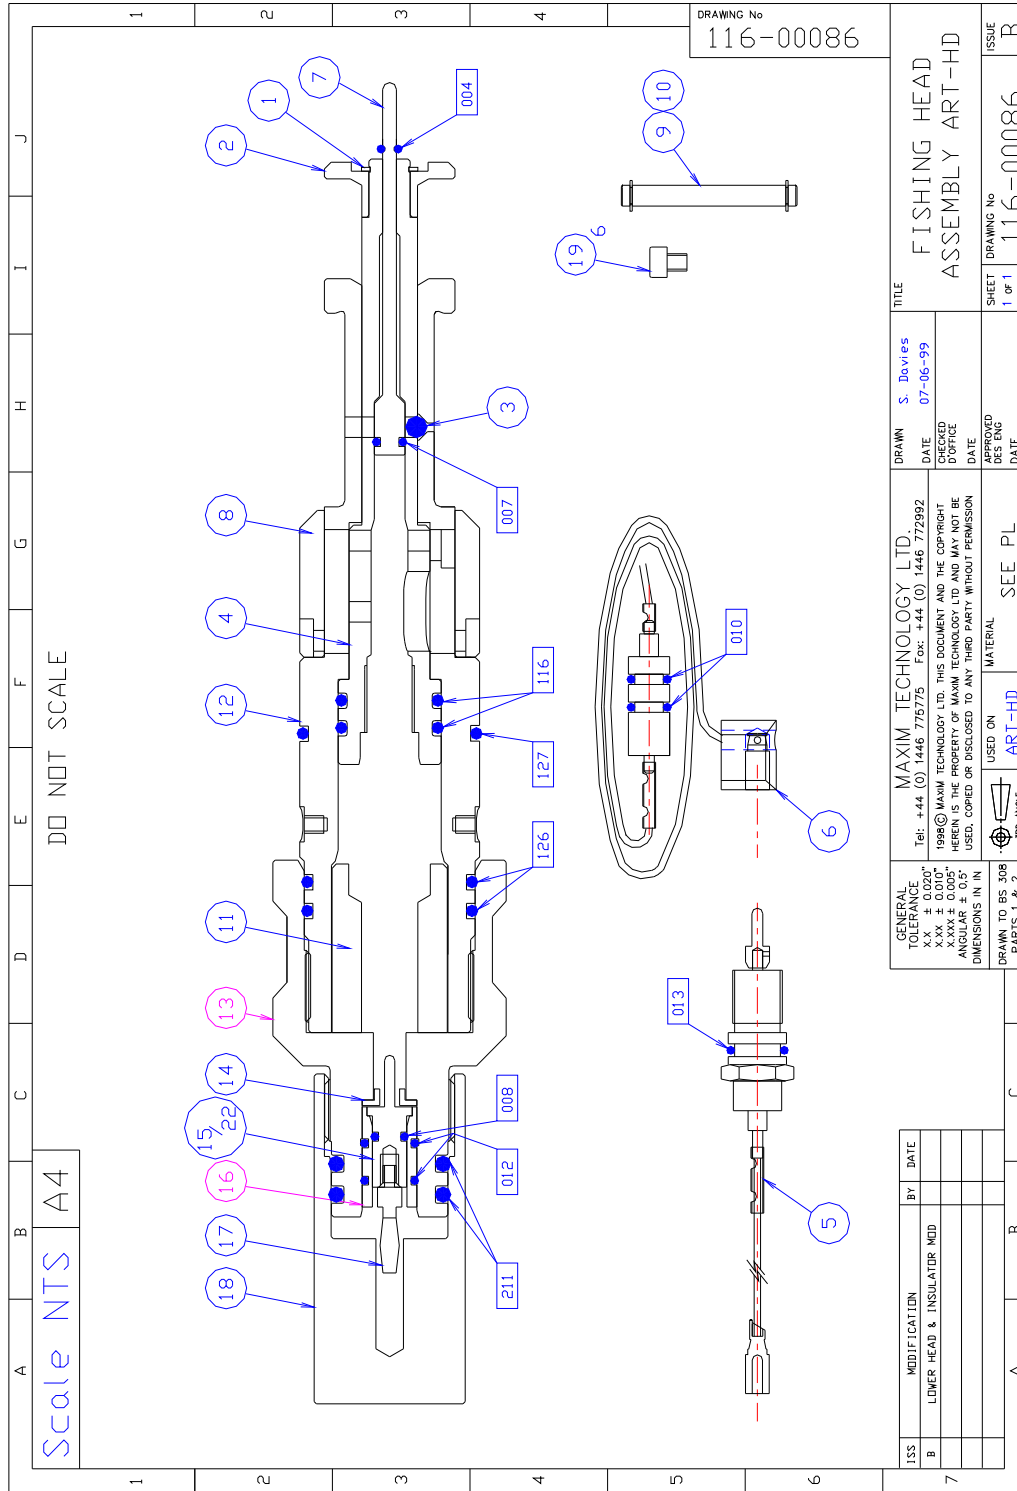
Assembly Drawing, Fishing Head, ART-H - 116-00086-B
